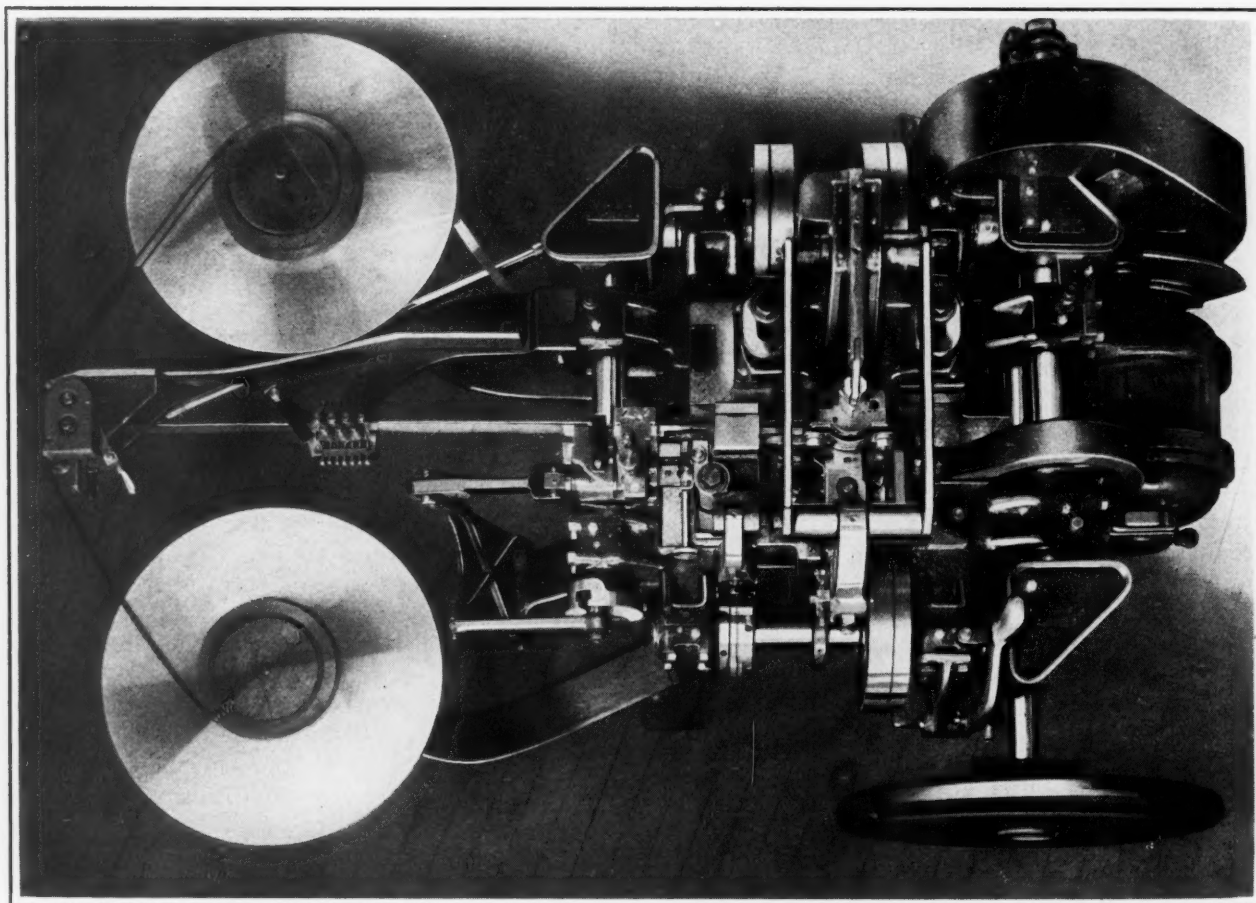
Multi-slide Machine Equipped to Emboss, Form, Assemble, and Cut Off Part O, Fig. 1
